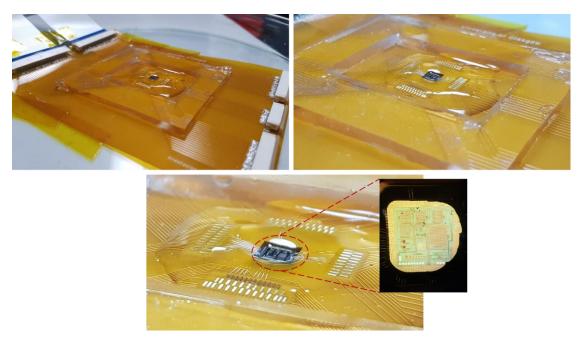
Photographs of the encapsulated ICs on the FPCB.
